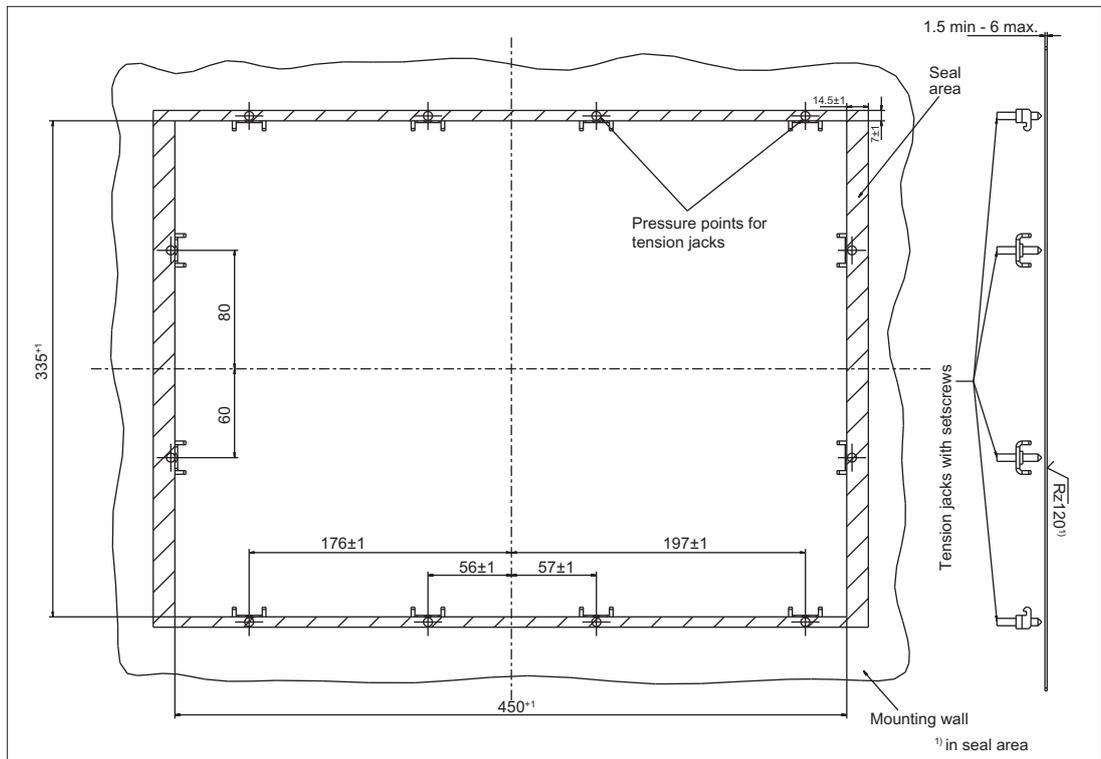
Dimension sheet for installing the TP 015AT operator panel front
